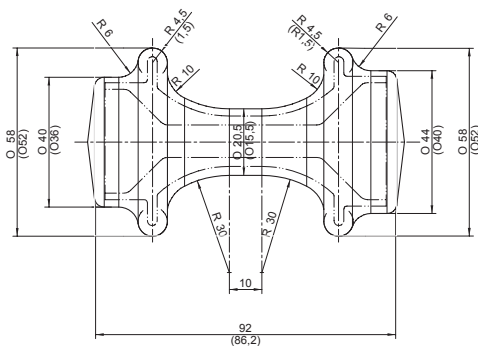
The wheel hub forging made by means of forging on hammer; forging inclinations 7° , not given radii R3
